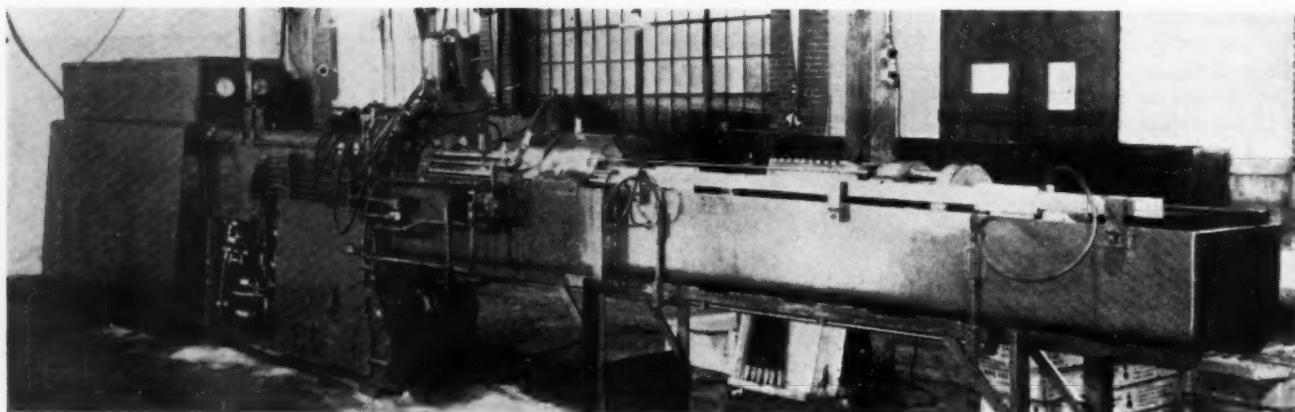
LAPOINTE 0.50-CALIBER BROACHING MACHINE
